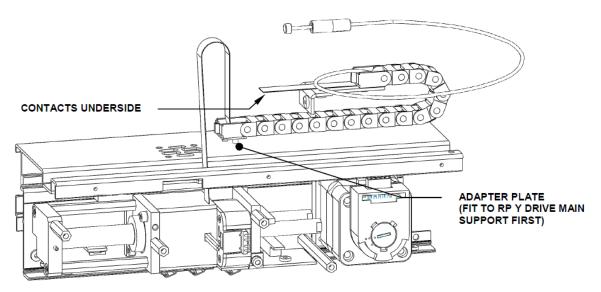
Removing the Cable and Tube from the Y Drive Chain
